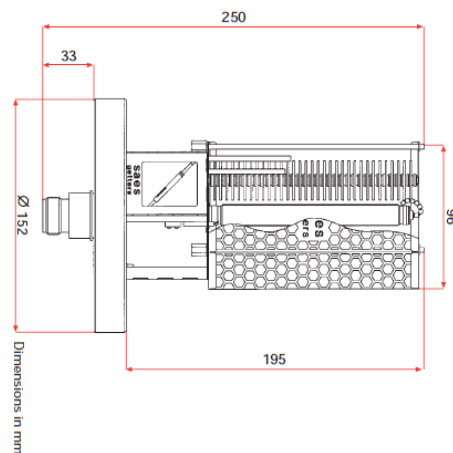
Drawing and dimensions of a CapaciTorr pump. Courtesy of SAES Getters.
